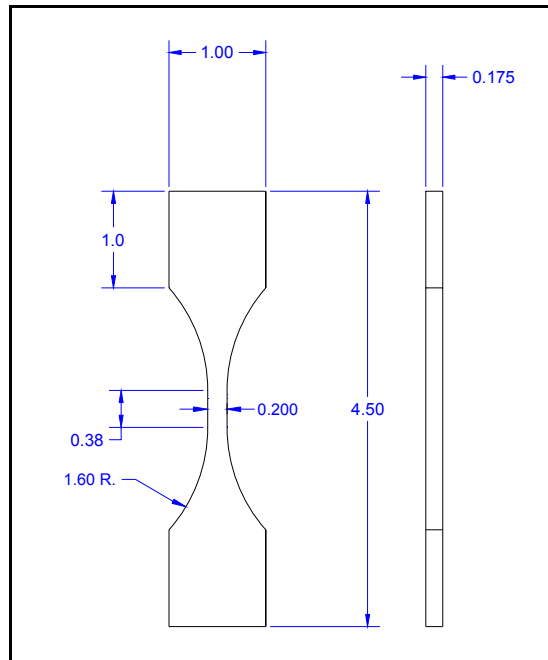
Axial Fatigue Test Specimen Geometry
